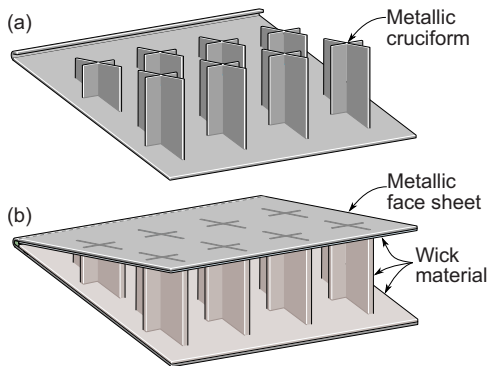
A structural heat pipe for the leading edge of a hypersonic vehicle showing (a) a cutaway view with the metallic wick material removed to show the cruciform structural members, and (b) the assembly with both metallic faces and the wick installed
